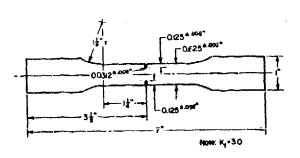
NOTCHED SHEET FATIGUE SPECIMEN
